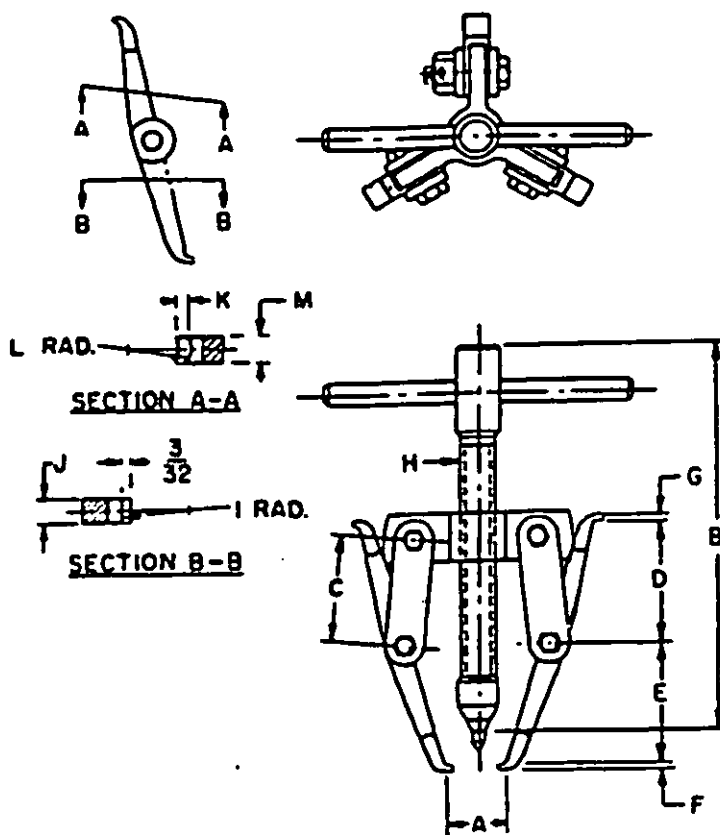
Type II, puller, mechanical, bearing, three-jaw, double end grip, aircraft electrical accessories.
